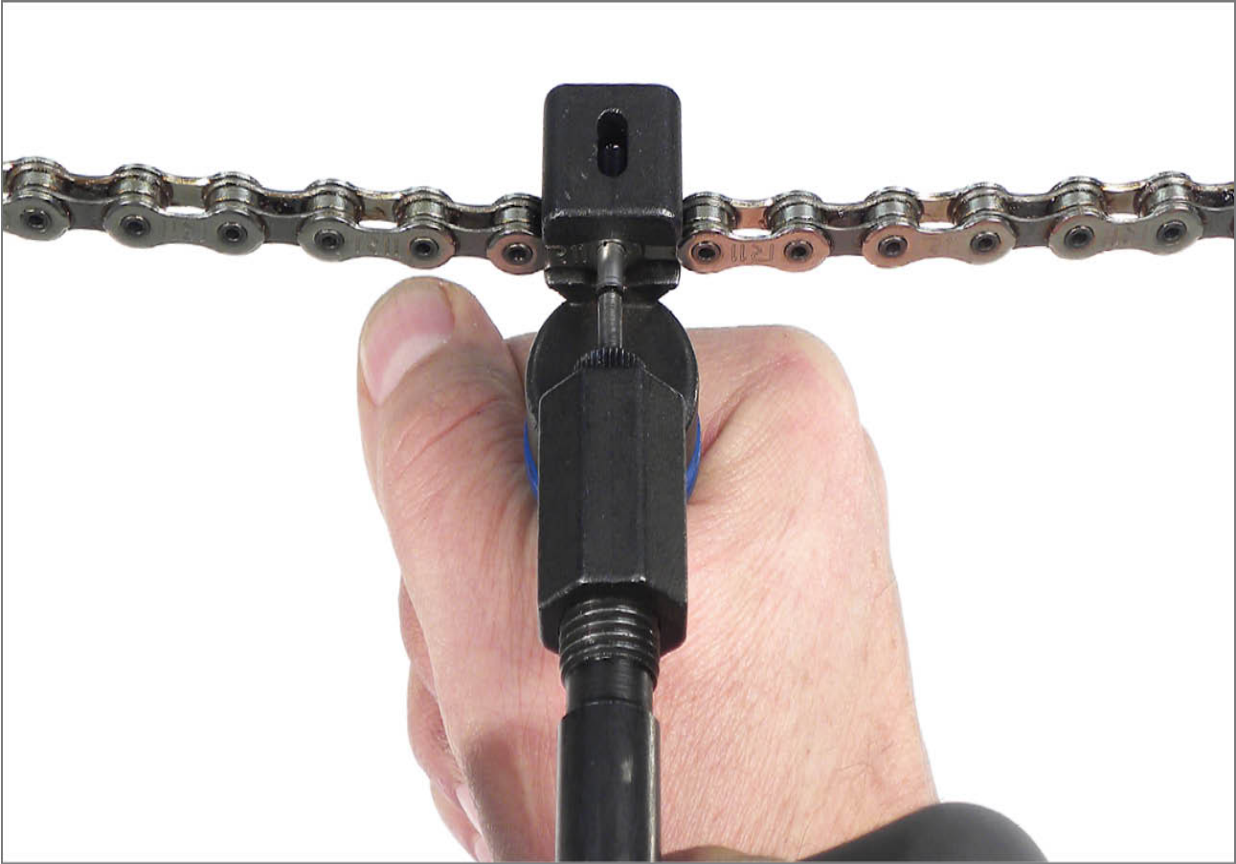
Pressing the Campagnolo® coupling rivet
